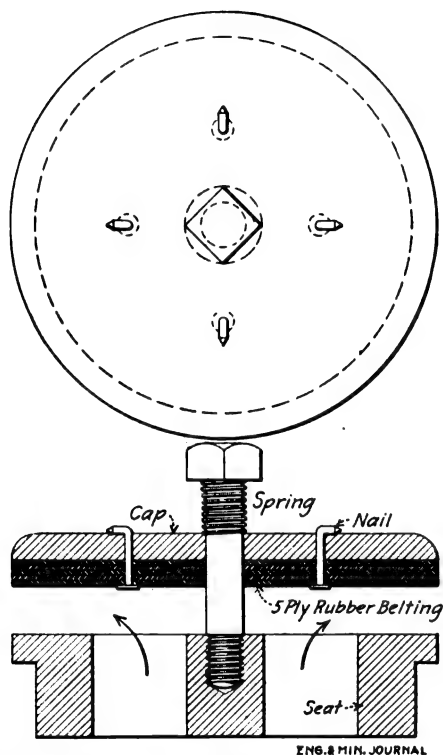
PUMP DISKS OF OLD RUBBER BELTING.
